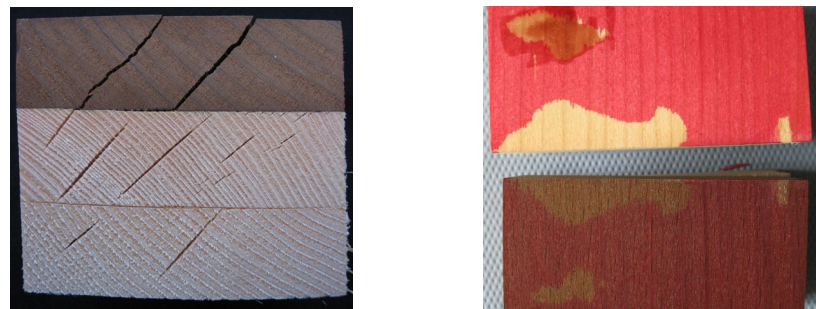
laminated profile with one lamellae of modified wood (left); example of lack of adhesion between modified and untreated wood (right)
